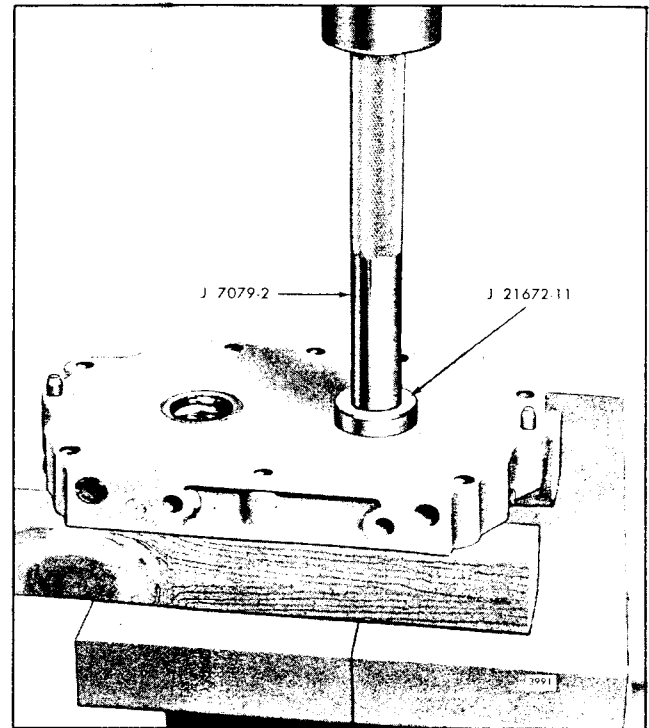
Removing Oil Seal and Roller Bearing from Rear End Plate (Former Blower)
